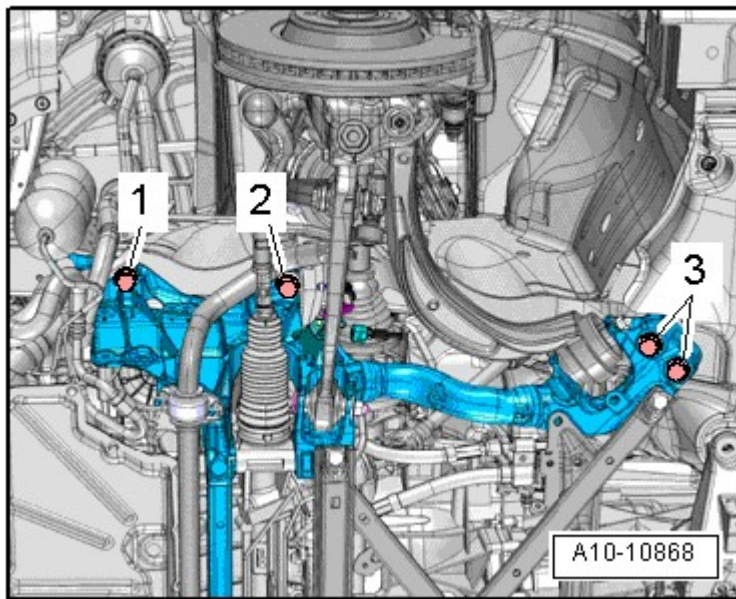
Identifying Subframe Bolts (Tighten To Specifications)
